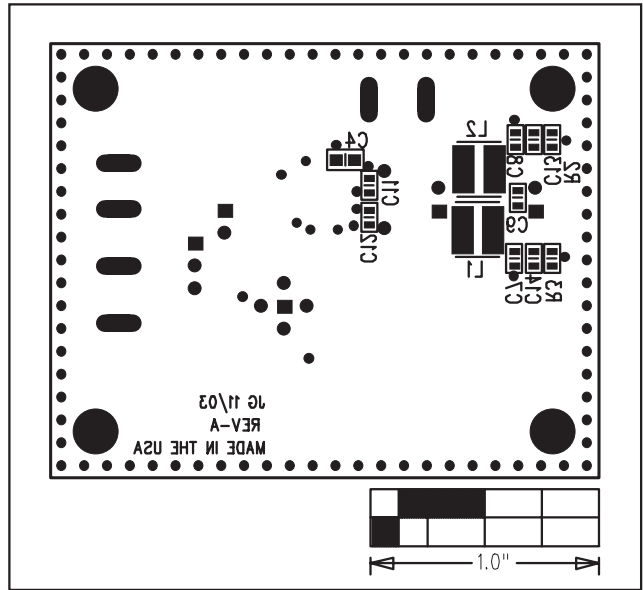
MAX9700B EV Kit Component Placement Guide—Solder Side
